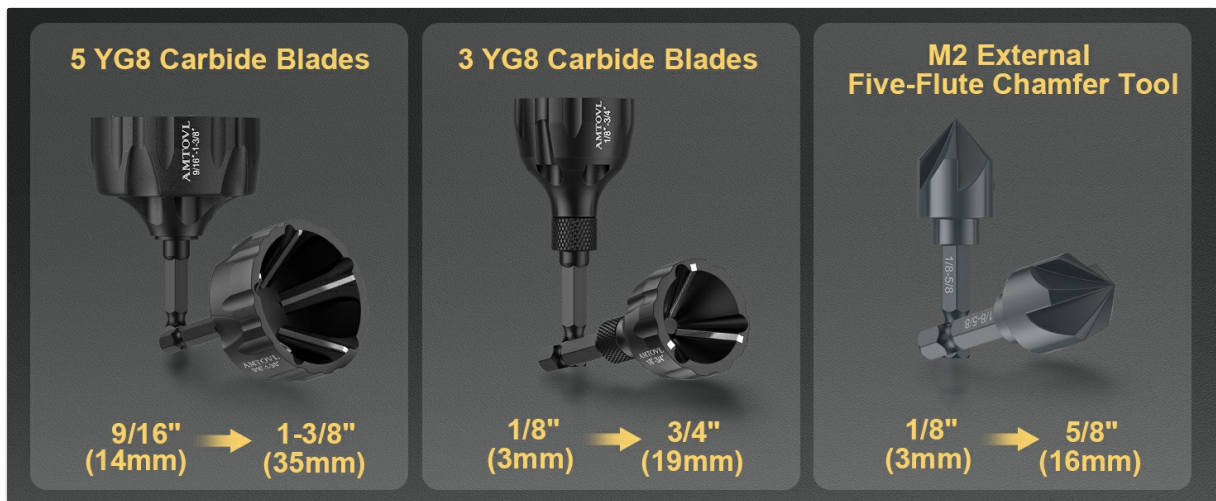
Visual comparison of the large external chamfer tool (9/16"-1-3/8"), small external chamfer tool (1/8"-3/4"), and the M2 external five-flute chamfer tool (1/8"-5/8").
